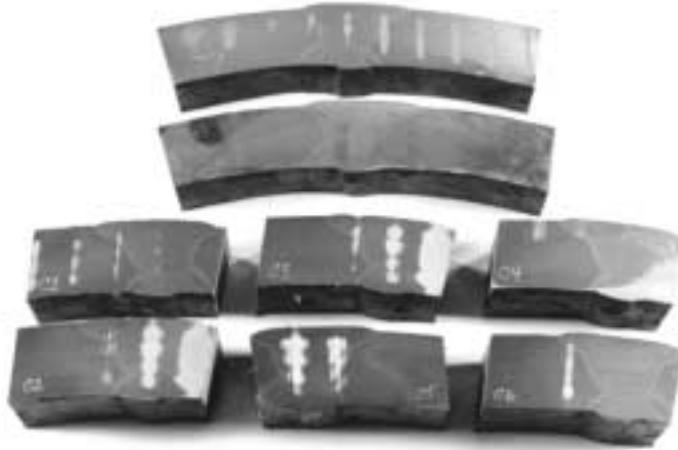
Photograph of the varied spool piece specimens used in testing and analysis
